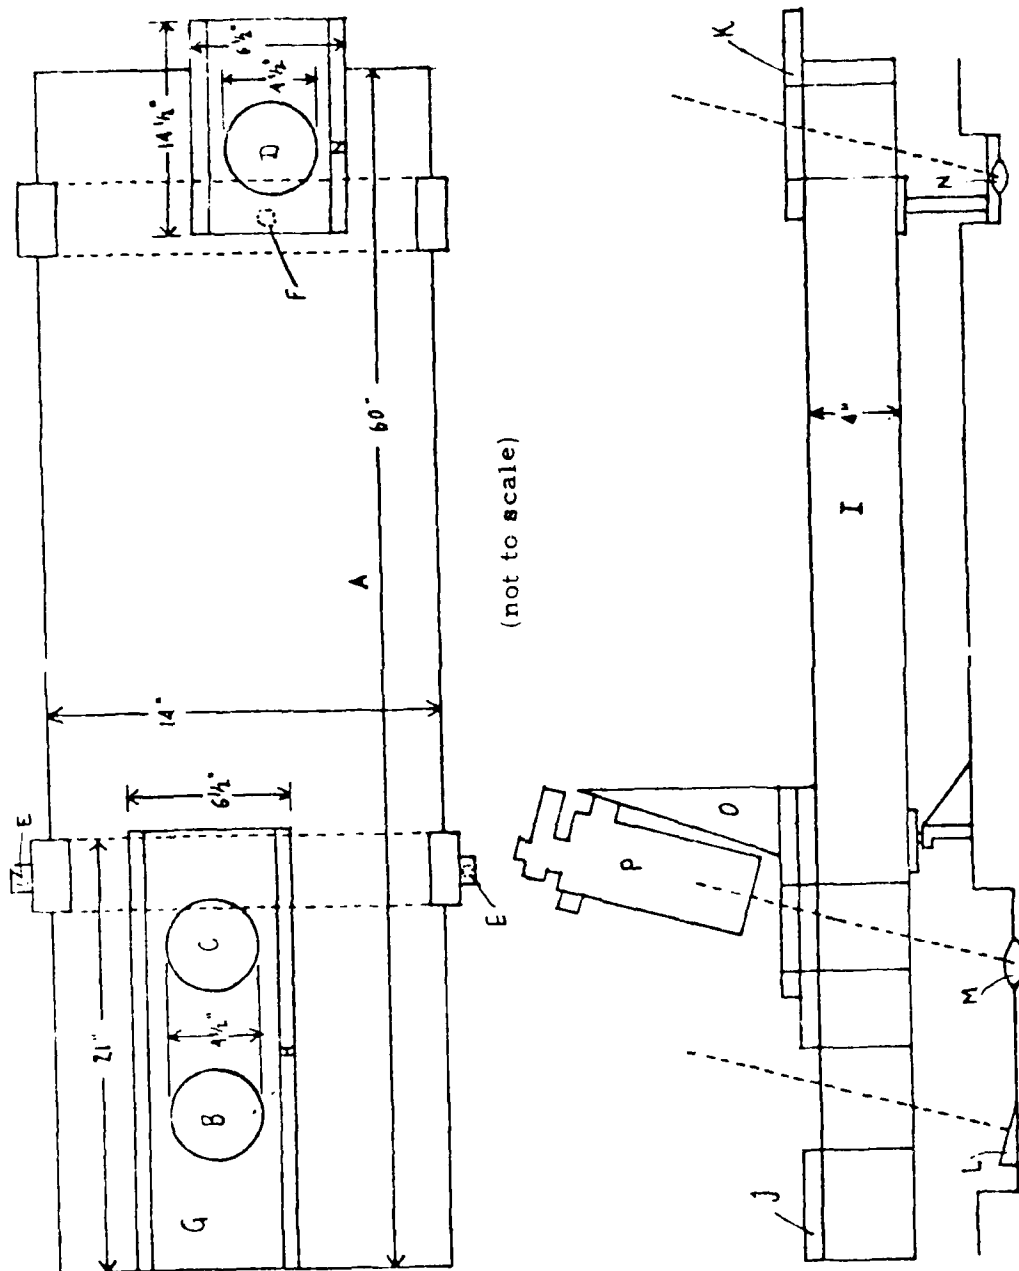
Schematic drawing of the aligner. A) Plan view of bonded honeycomb sandwich panel; B) radiometer opening; c) photometer opening; D) video camera opening; E) aft legs; F) forward leg; G) pad; H) orientation rails. I) Side view of panels; J) aft pad; K) forward pad; L) radiometer reference mirror; M) photometer lens; N) camera lens; O) sled; P) autocollimator.
